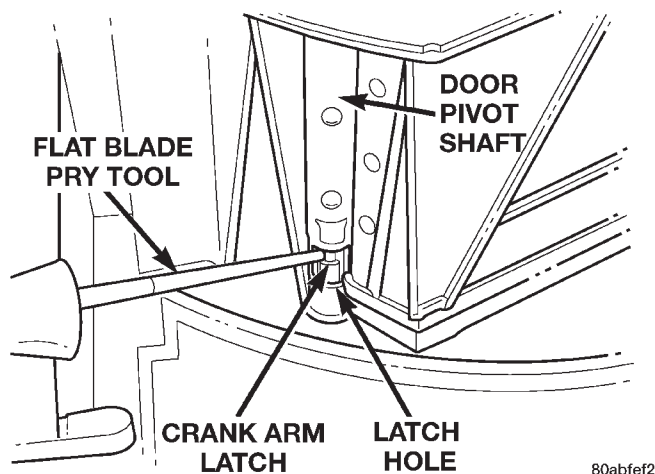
Mode Door Crank Arm Remove/Install - Typical
